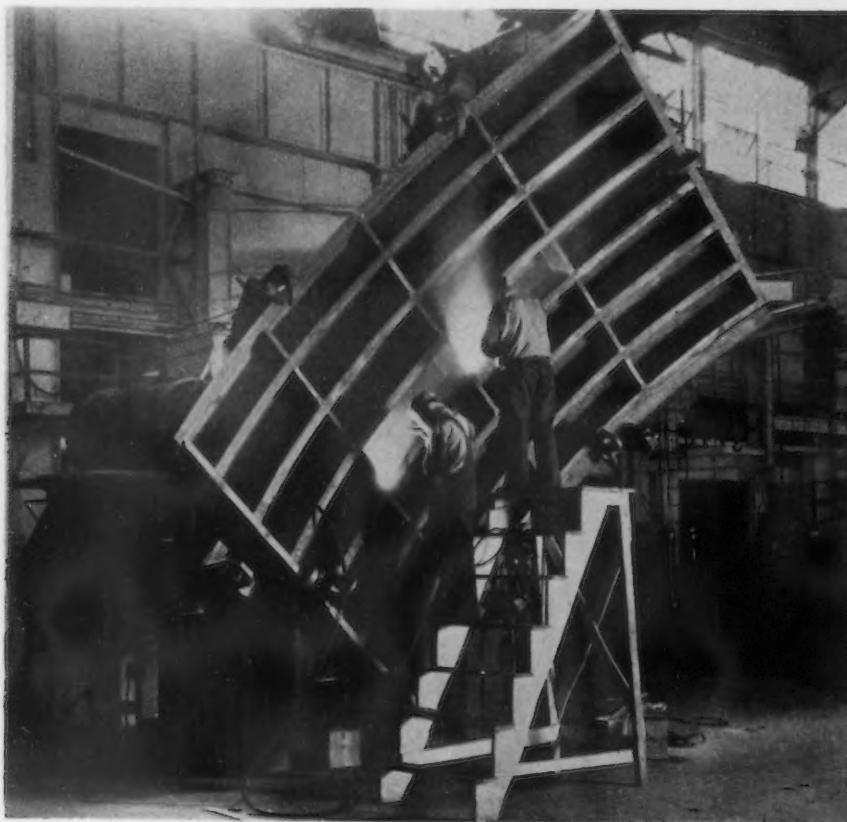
Rotating fixture (below) for welding the bracing ribs and end plates while positioning the segments.
